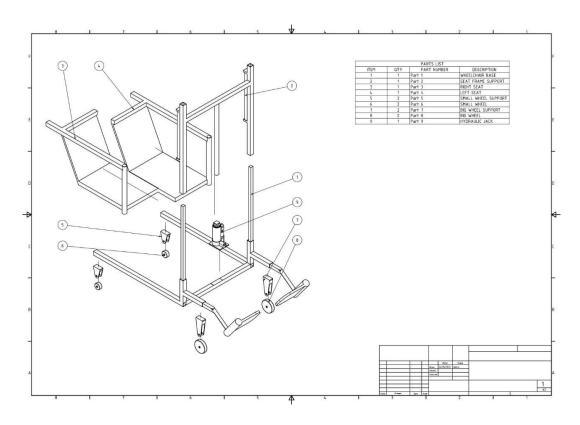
EXPLODED VIEW DIAGRAM USING AUTODESK INVENTOR
